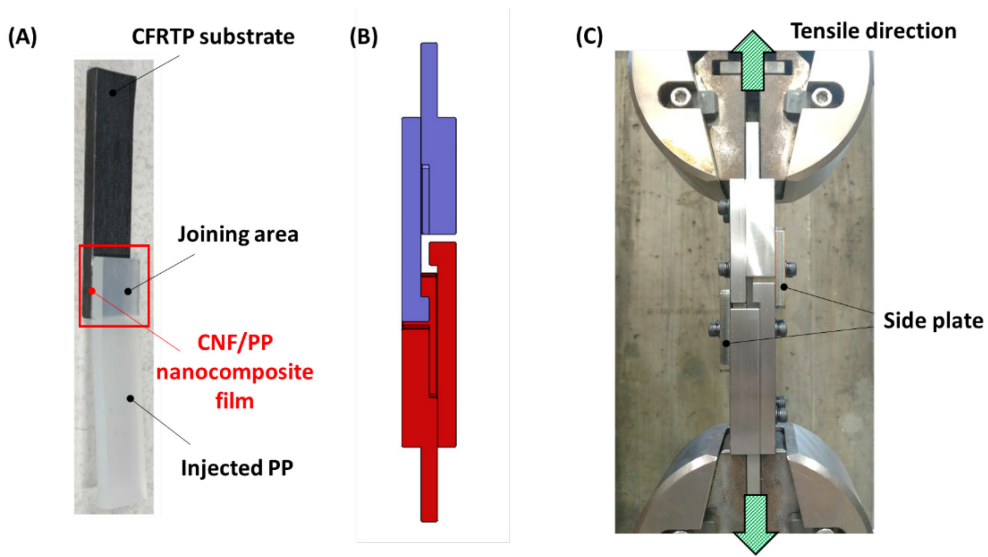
(a) The fabricated single lap joint through the injection overmolding process; (b) the cross-section view of the self-designed fixture for the tensile shear test; and (c) the actual fixture with side plates set in the universal testing machine.
